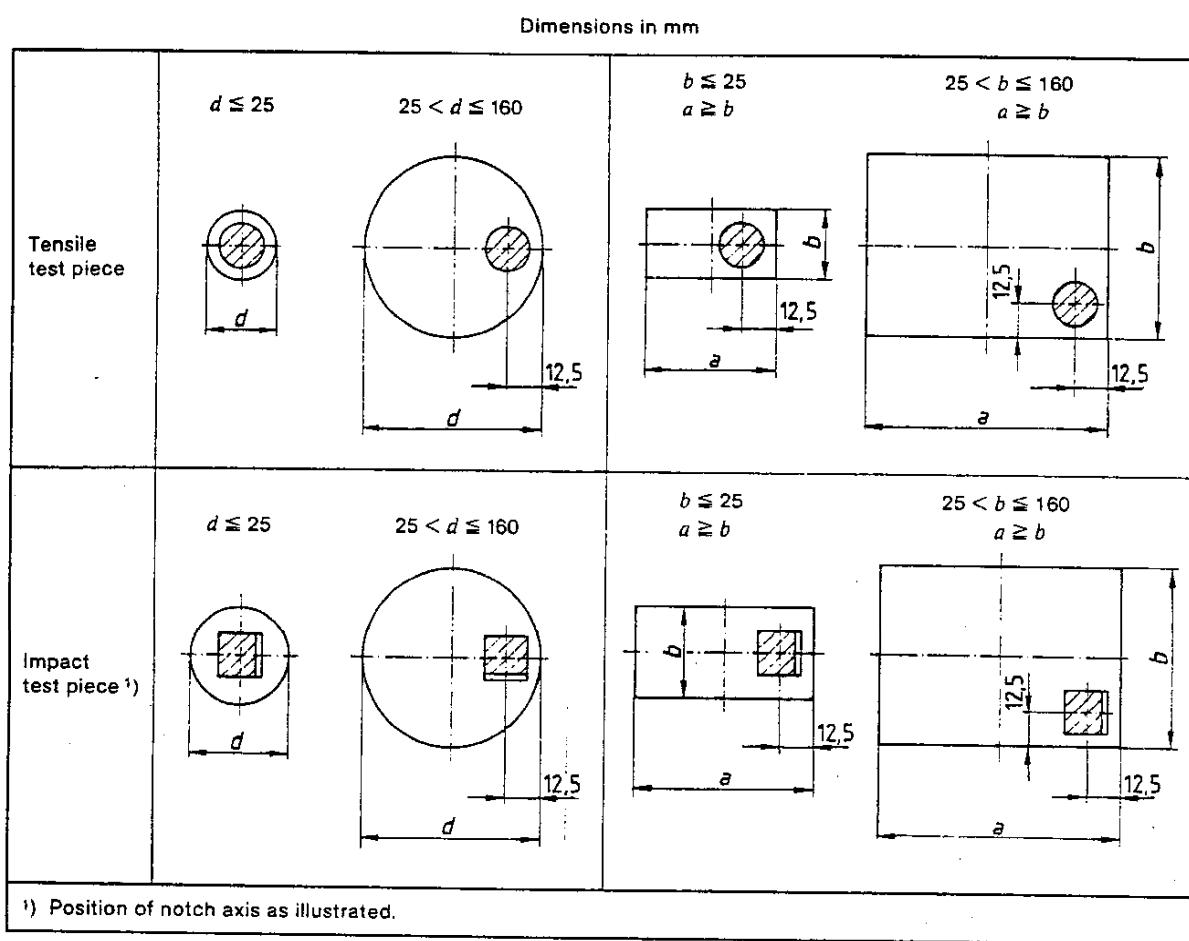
Location of test pieces to be taken from steel bars and wire, including hexagons and similar cross sections
